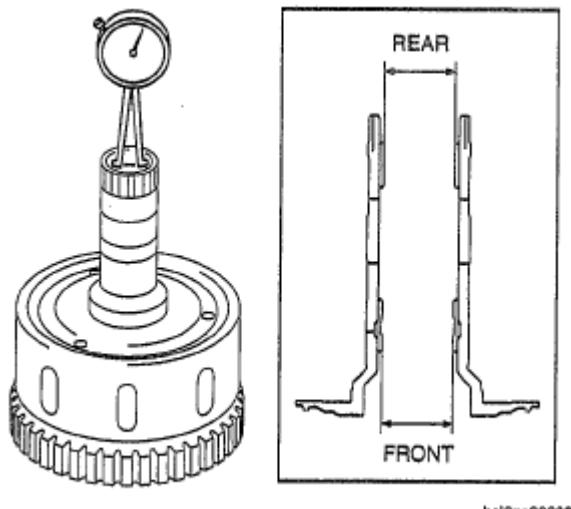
Measuring Inner Diameter Of Clutch Hub Bushings Using Dial Gauge
